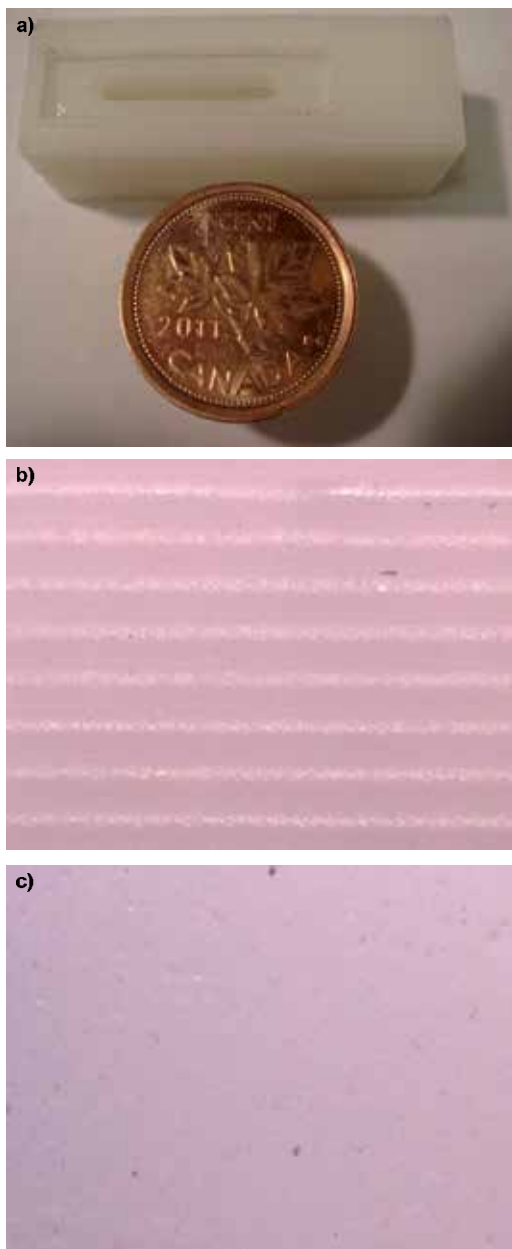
(Color on-line.) Photographs of: a) a 3d printed microplasma device with a coin included for size; b) the front side of the 3d-printed device (taken under 60x magnification); and c) the front side of the device machined out of PTFE (taken under 60x magnification).
